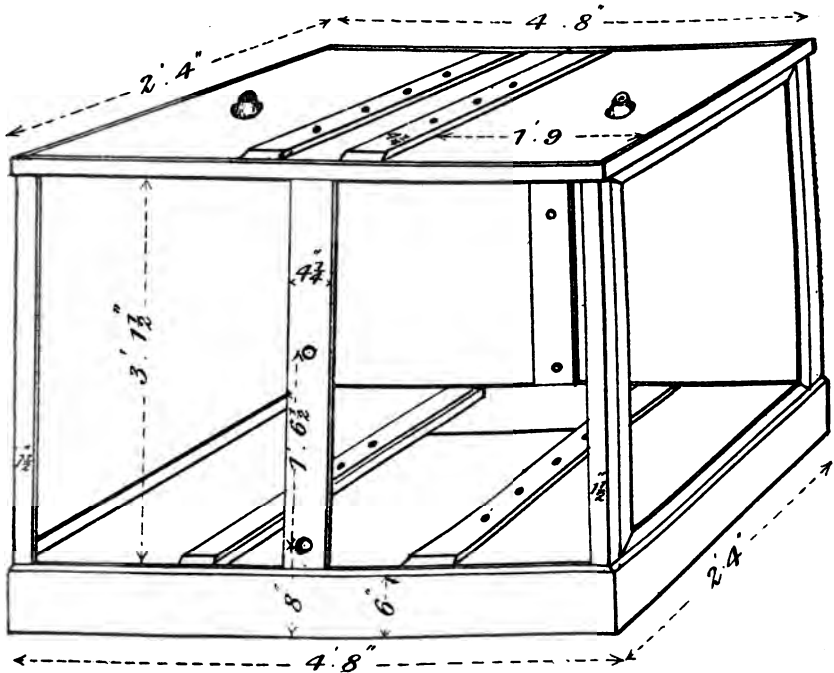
CASE OF 12-PLATE WIMSHURST MACHINE.
